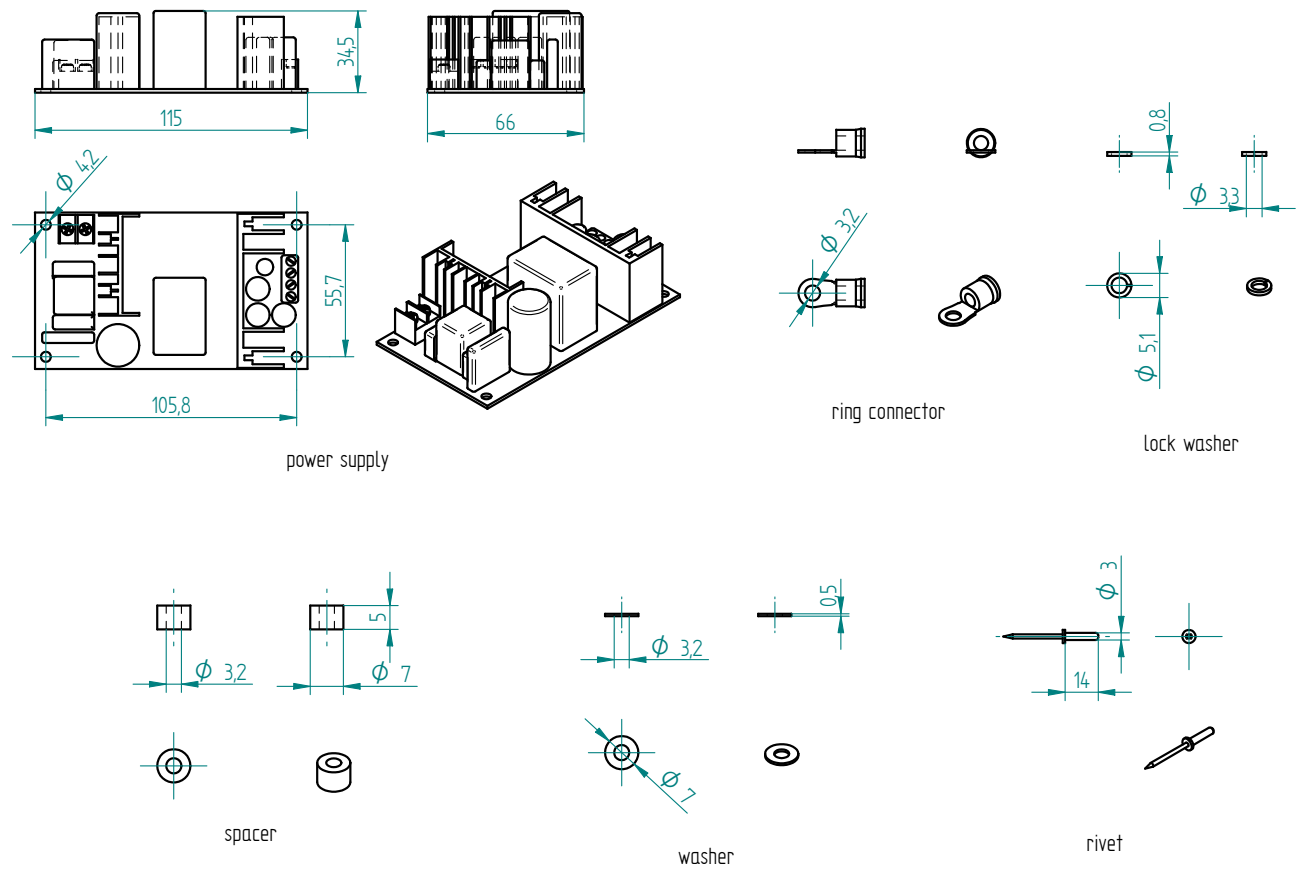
power unit p/housing/power supply/parts drawing
